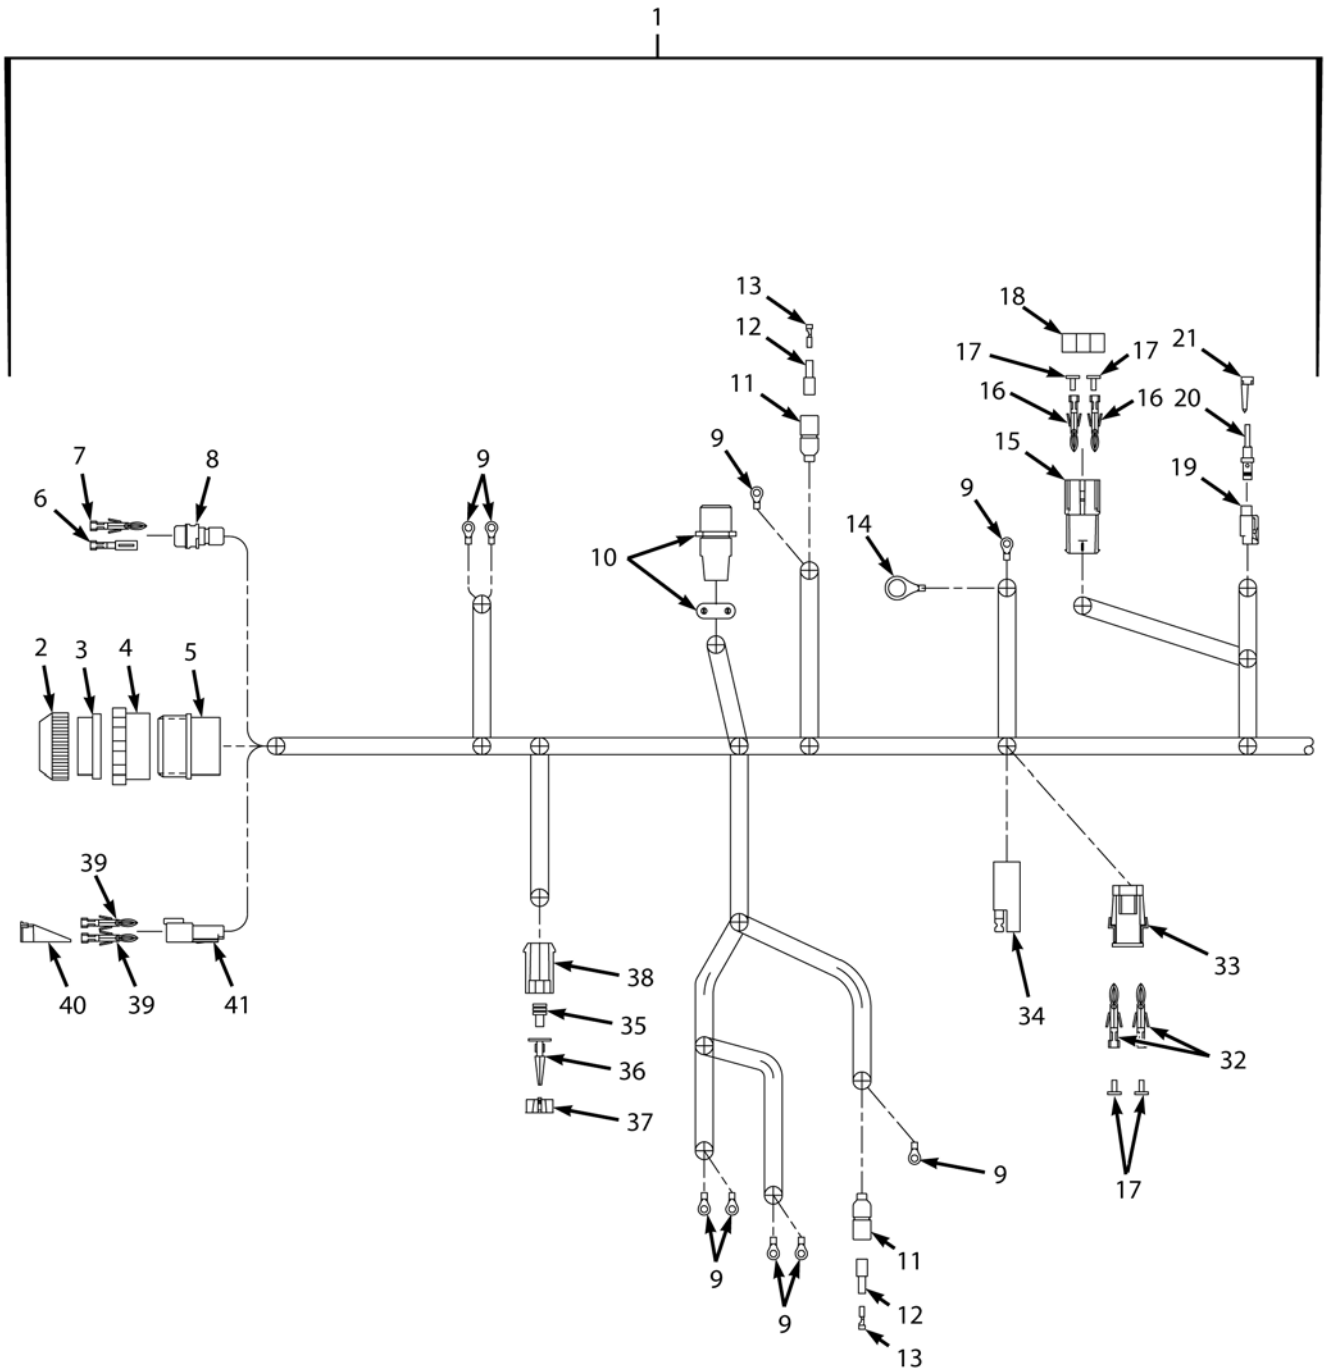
CHASSIS WIRING HARNESS (SHEET 1 OF 2)
